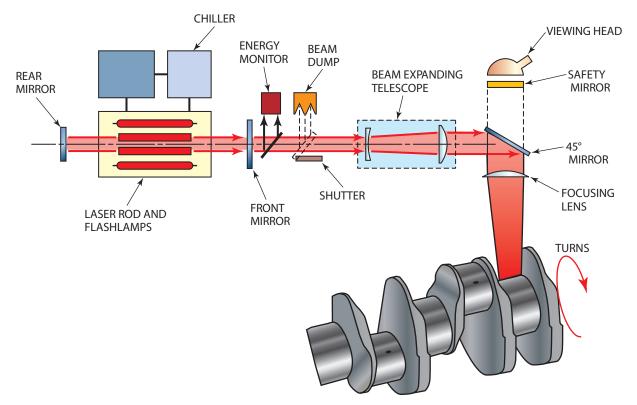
Diagram of laser surface hardening of engine crankshaft journals.
